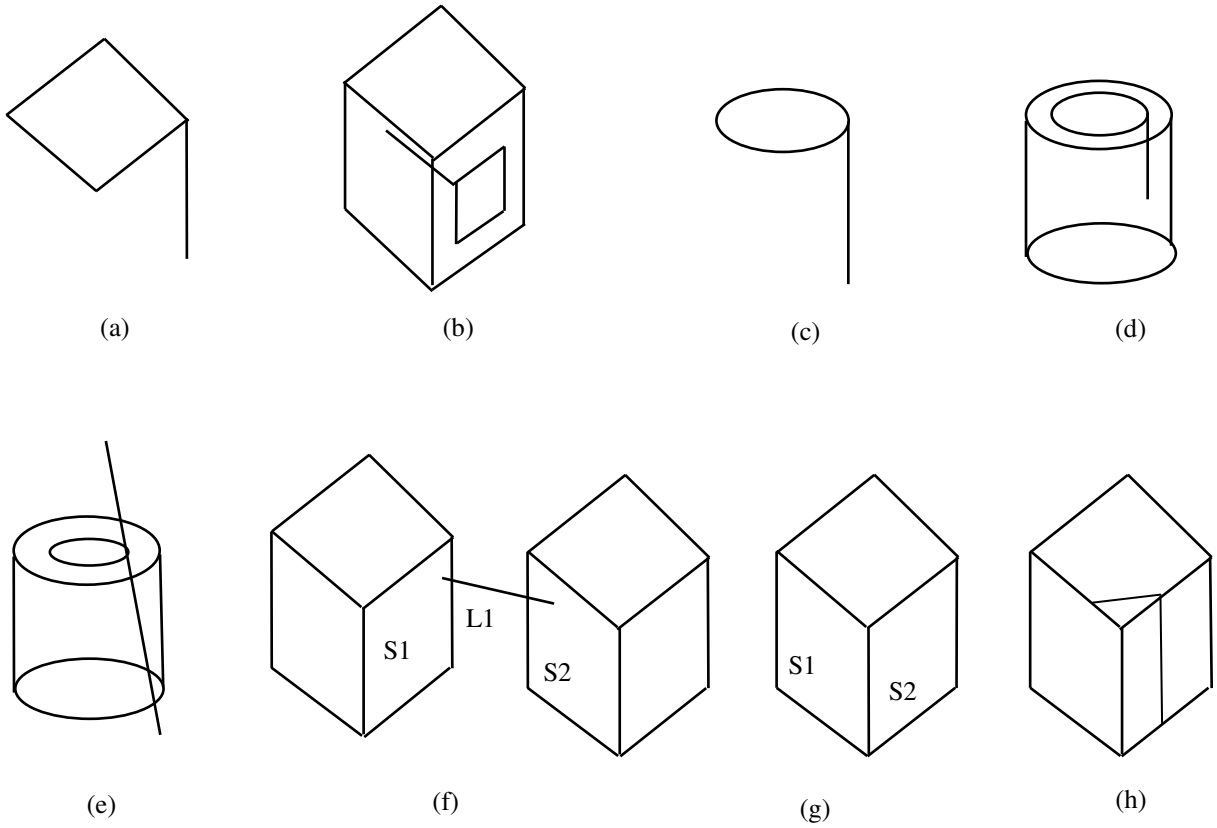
Figure 8. Features: (a) box; (b) rectangular hole; (c) cylindrical shift; (d) cylindrical hole; (e) revolution; (f) ruled surface; (g) sweeping surface; (h) chamfer
